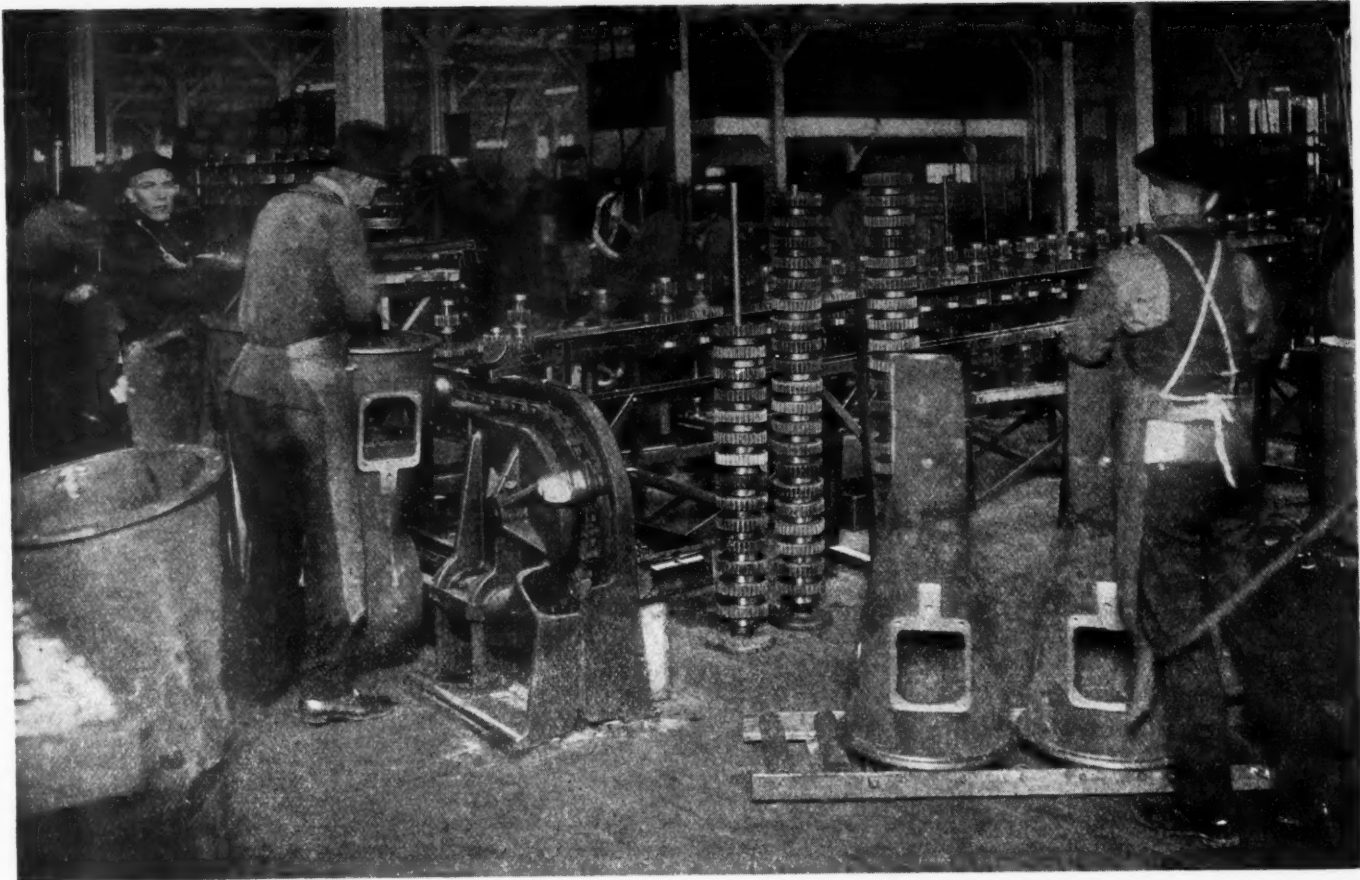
Looking ahead at the beginning of the transmission and rear axle assembly. Note the hooks on the chain which pick up the transmission housing and note the carriers from the arbor pressing department carrying the shafts with the gears in place
